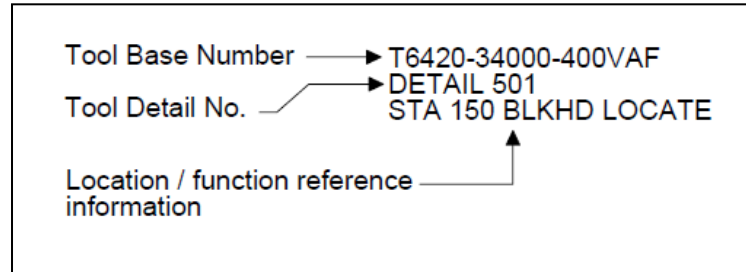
REMOVABLE DETAILS, DESIGN TOOL
